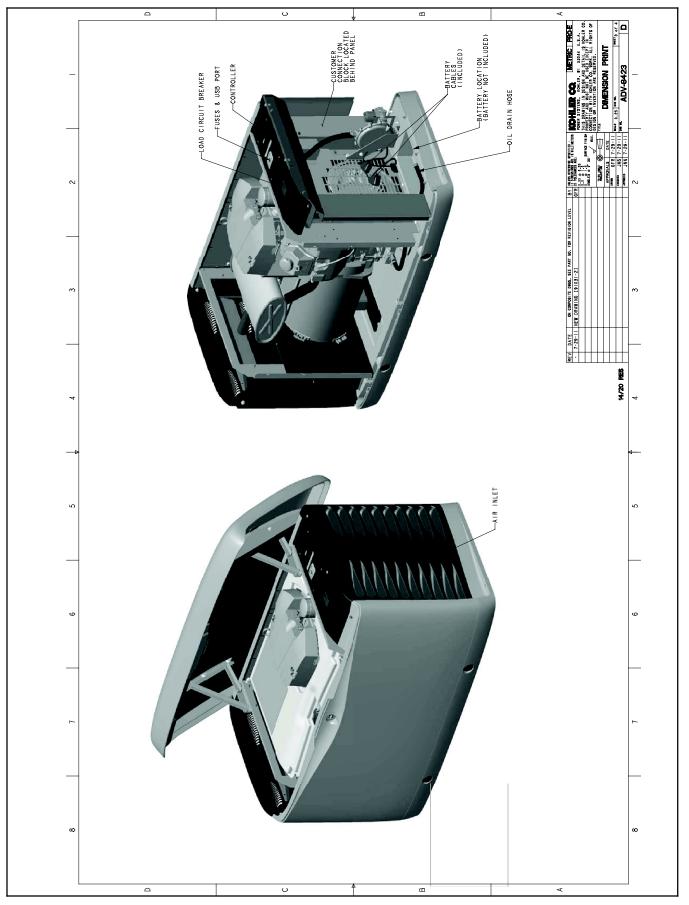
Dimension Drawing ADV-8423, Sheet 3
